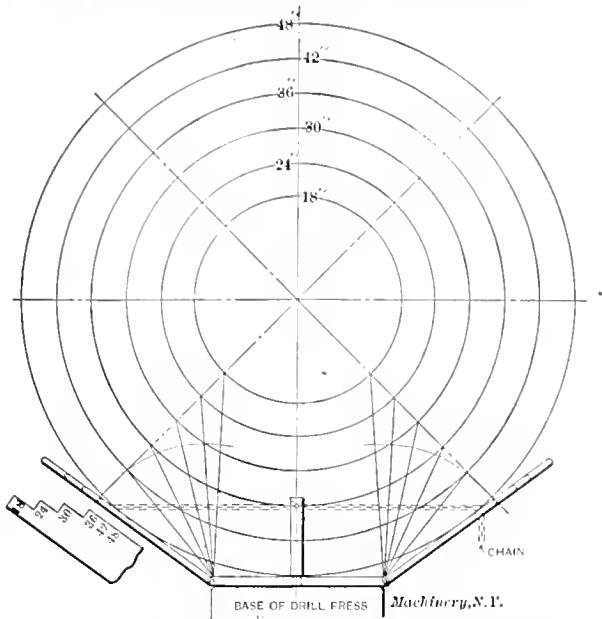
Layout of a Large Adjustable V-block for Special Work
